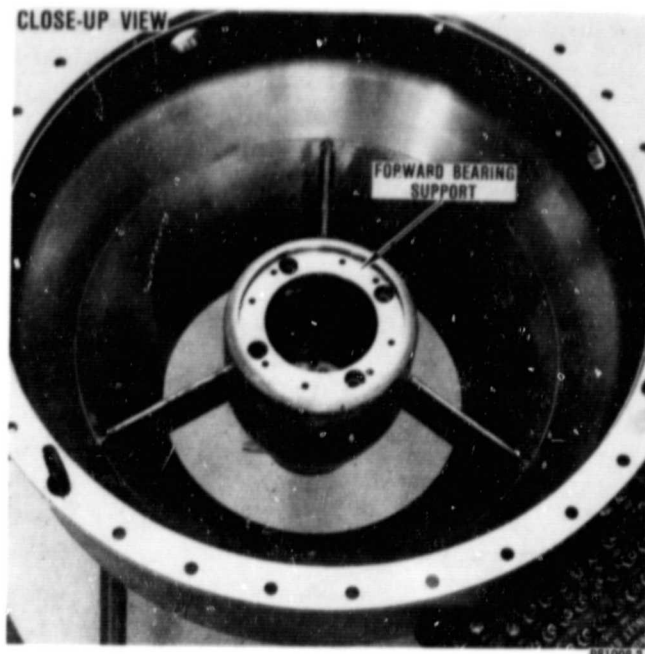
Inlet Housing, Showing Forward Bearing Support.
